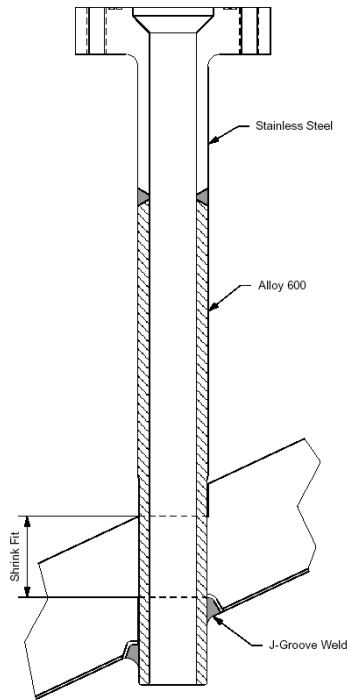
Schematic of the Davis-Besse CRDM nozzle showing the SS flange, Alloy 600 penetration, and J-groove weld between the RPV head and the penetration.
